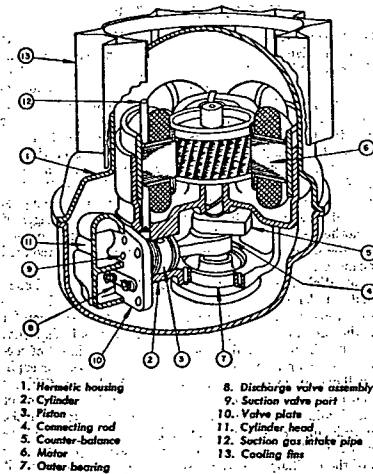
Hermetic Motor Condenser Unit with Reciprocating Pump
